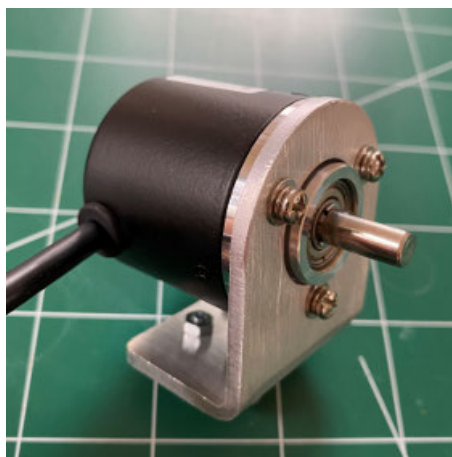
STEVAL-EDUKIT01 assembly sequence (1 of 11)
